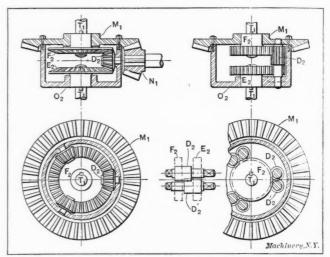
Sketch showing Principle of the Bevel and Spur Gear Types of Differential Gearing
